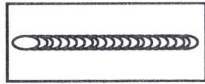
Surface discontinuity at weld edge of TT-2
